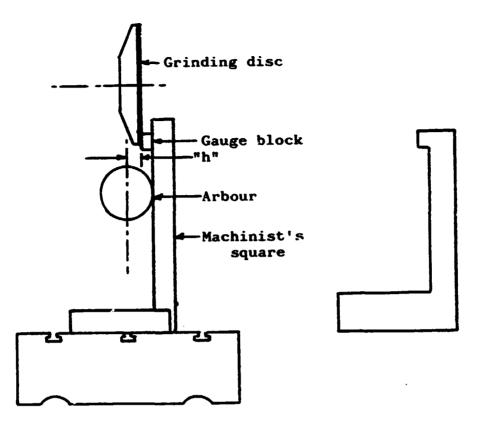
(a) Setting of dish wheel (b) Furpose made gauge
